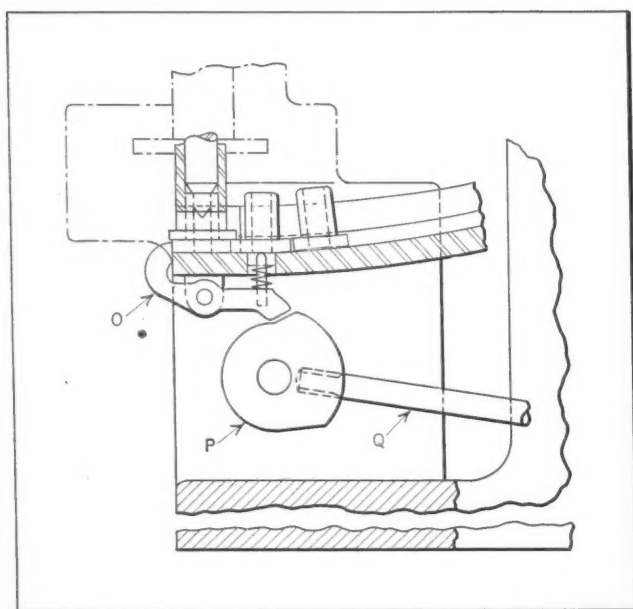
Section through Fixture and Bushing Chute (Fig. 2), Showing how Flow of Bushings is Regulated
